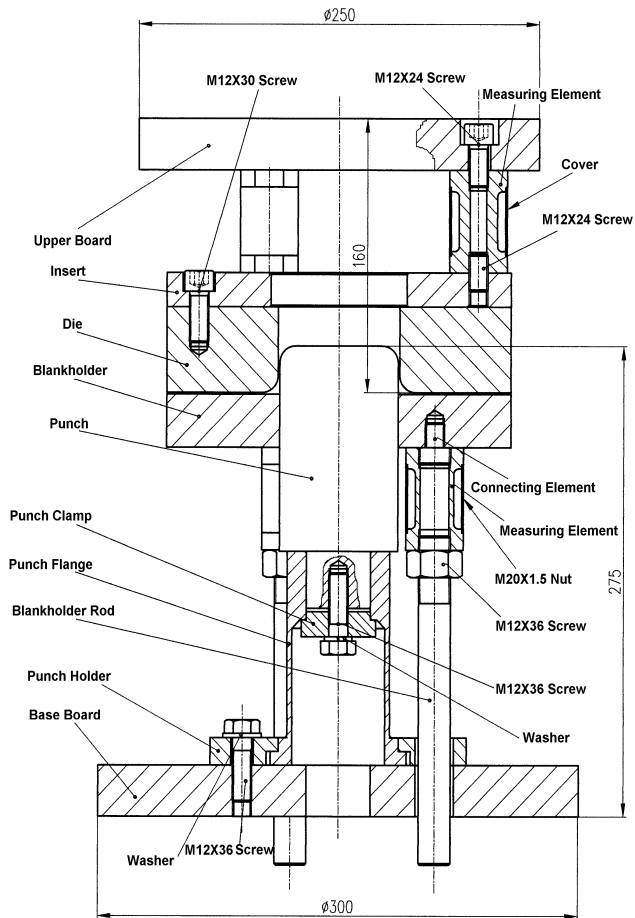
Experimental tool for deep drawing with quasi-elastic blankholder binder
